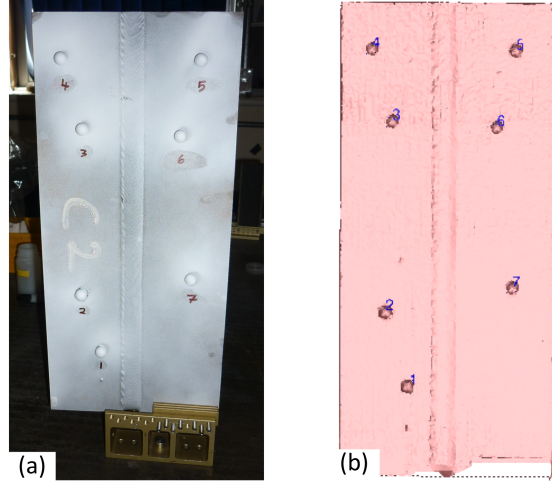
Co-ordinate measurements; (a) prepared weld, (b) virtual weld.
